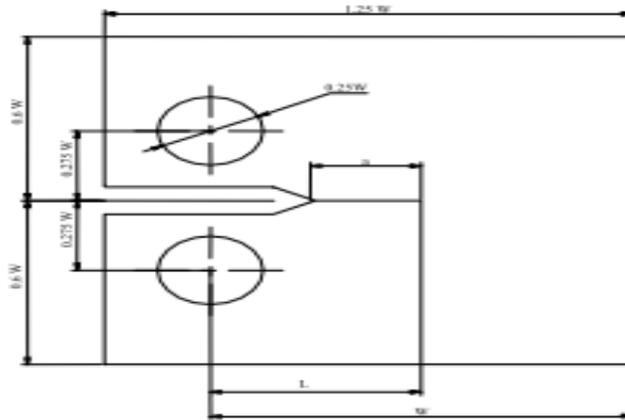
Configuration of compact tension specimen for fatigue and fracture mechanics-based testing
